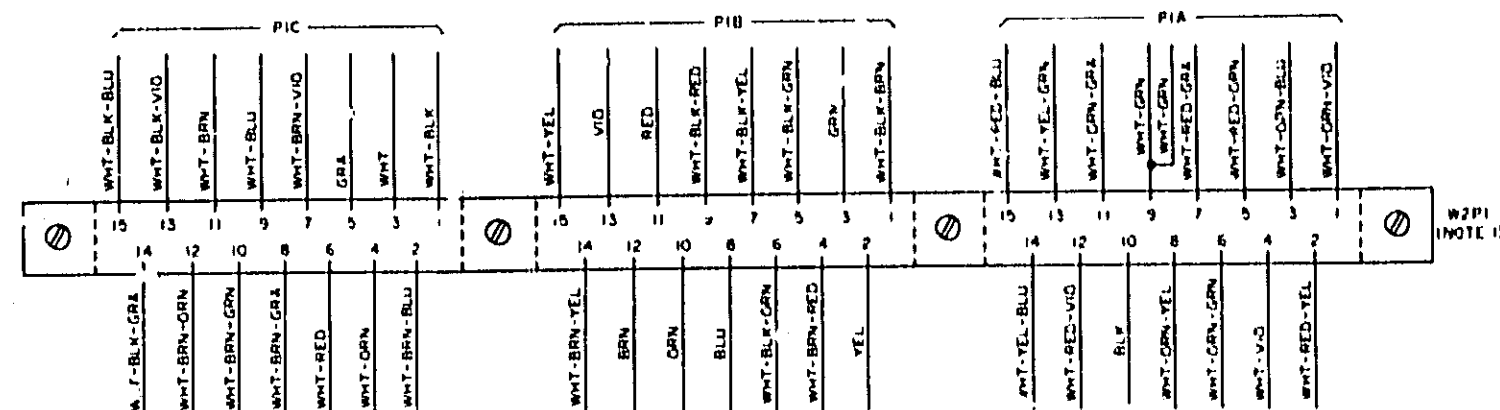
Option 002 Remote Programming Cable Assembly and Rear Panel Connector Assembly
